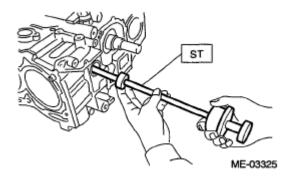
Removing Piston Pin Using Piston Pin Remover Courtesy of SUBARU OF AMERICA, INC.
